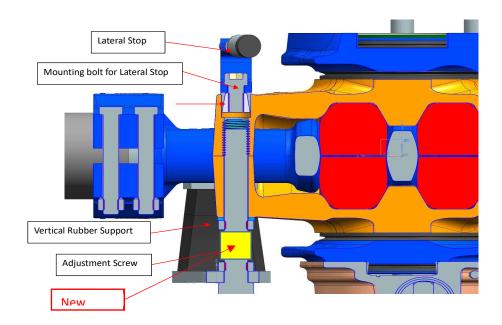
Cross Section through Coupler Bearing Housing with Proposed Sleeve
